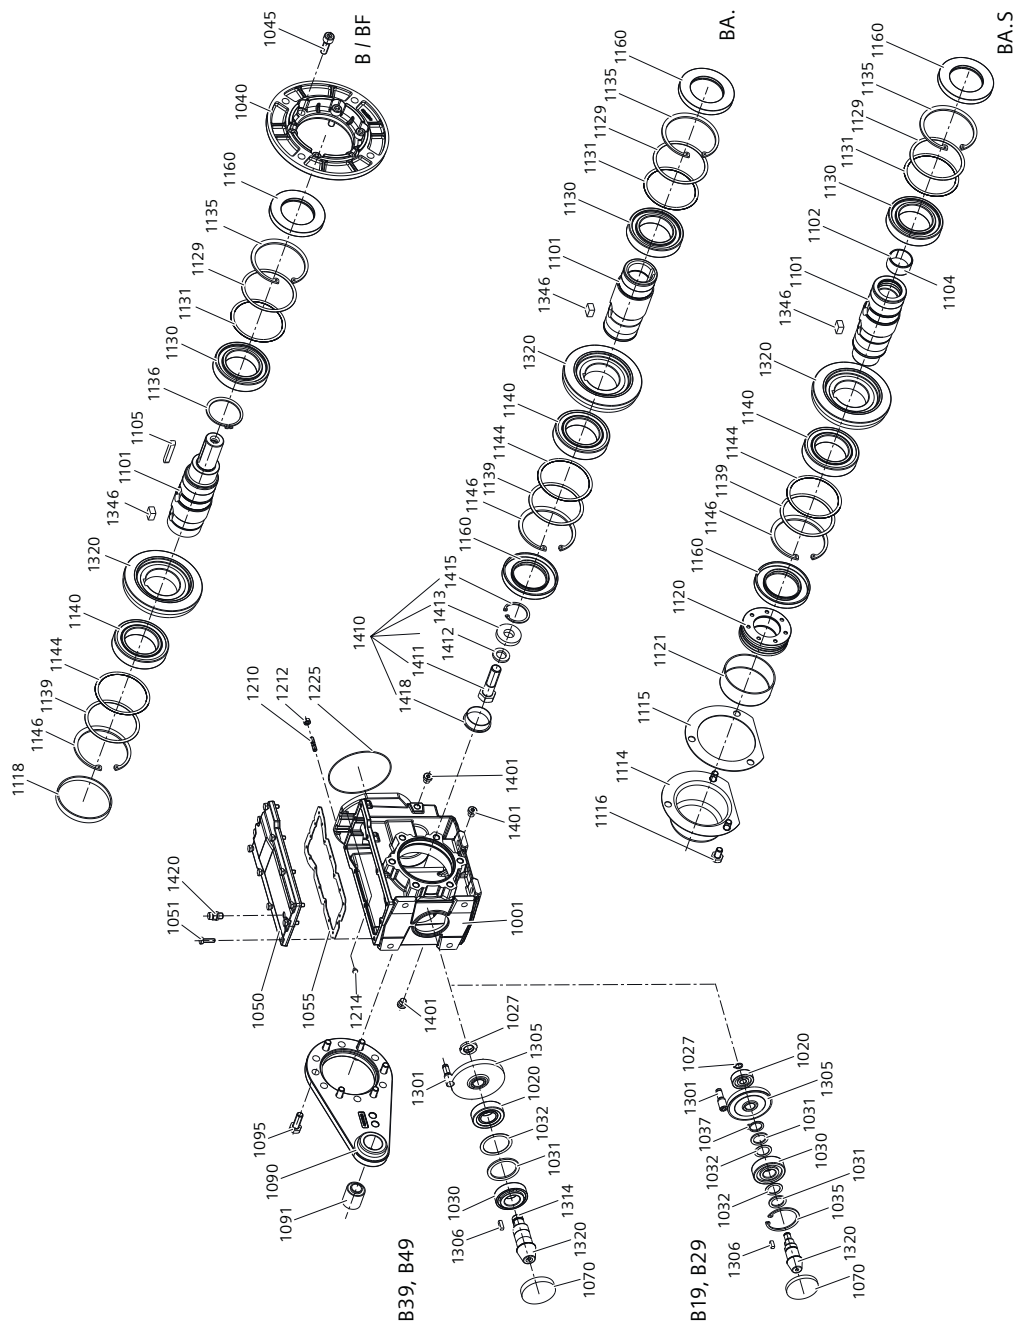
Bevel gearbox B, sizes 19 - 49
